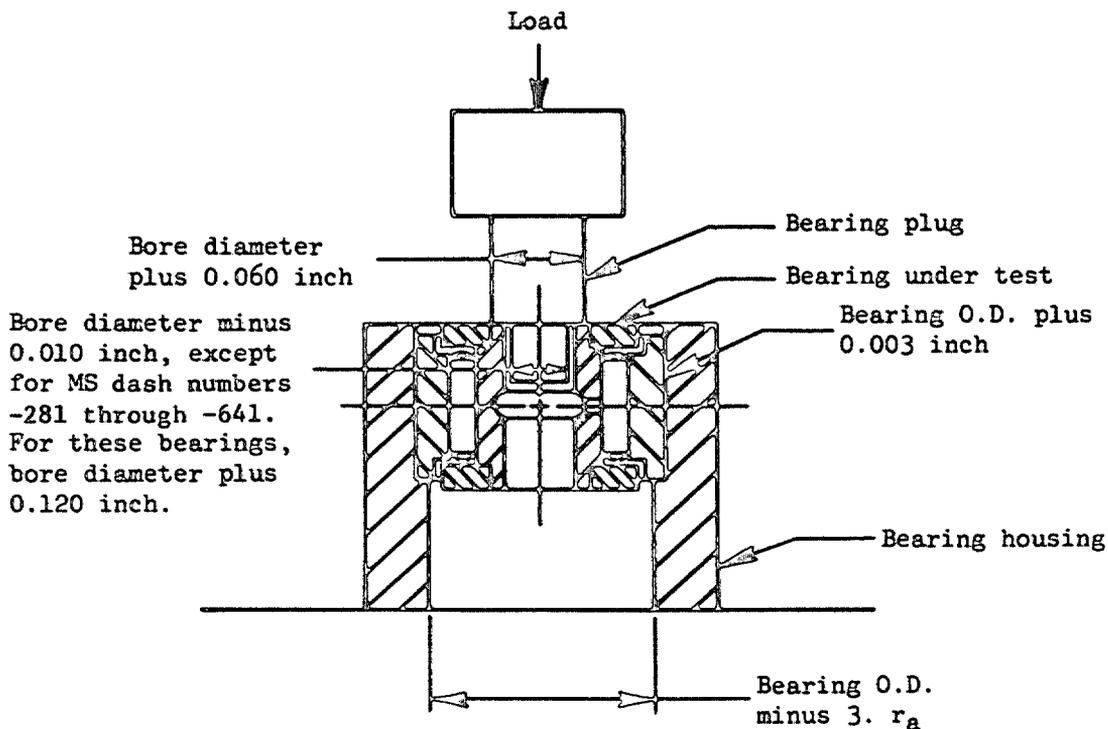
End washer pushout test for types I, III, IV, V, VI and X bearings.
